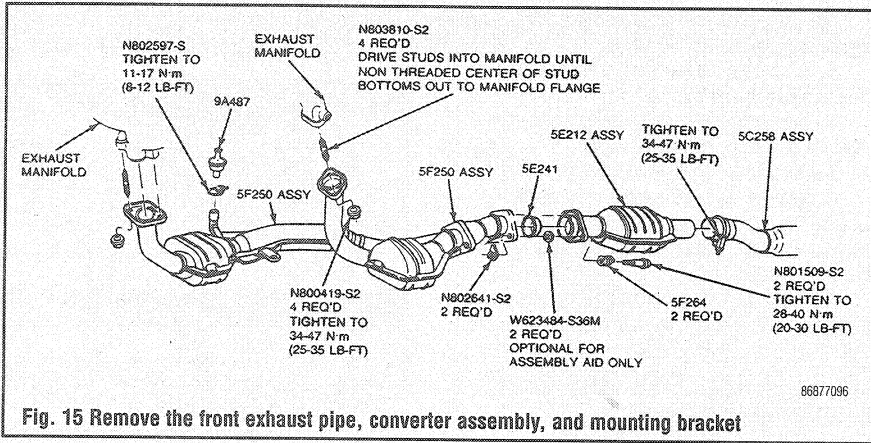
Remove the front exhaust pipe, converter assembly, and mounting bracket
